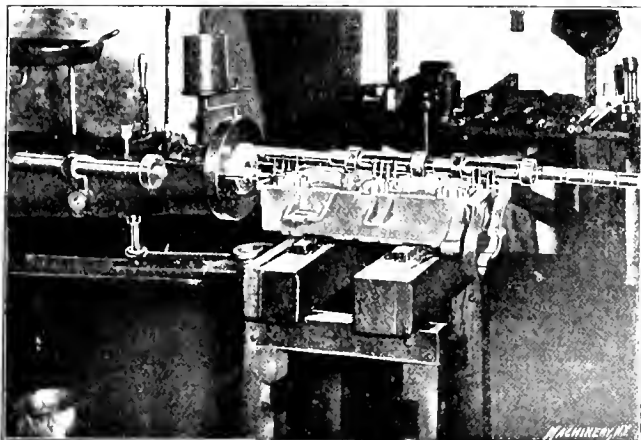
Special Broach for Broaching Crank-shaft Bearings after they are Reamed
